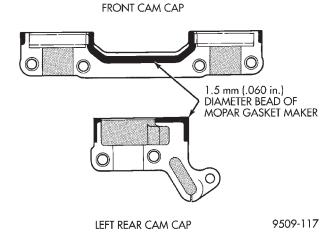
Camshaft Bearing Cap Sealing CAMSHAFT FOLLOWER
